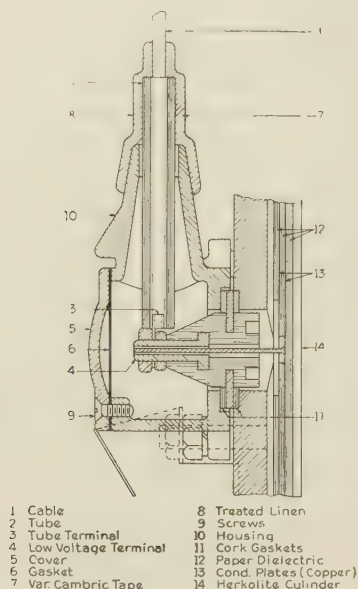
CROSS-SECTION DRAWING SHOWING METHOD OF BRINGING OUT TERMINAL FROM CAPACITANCE TRANSFORMER
